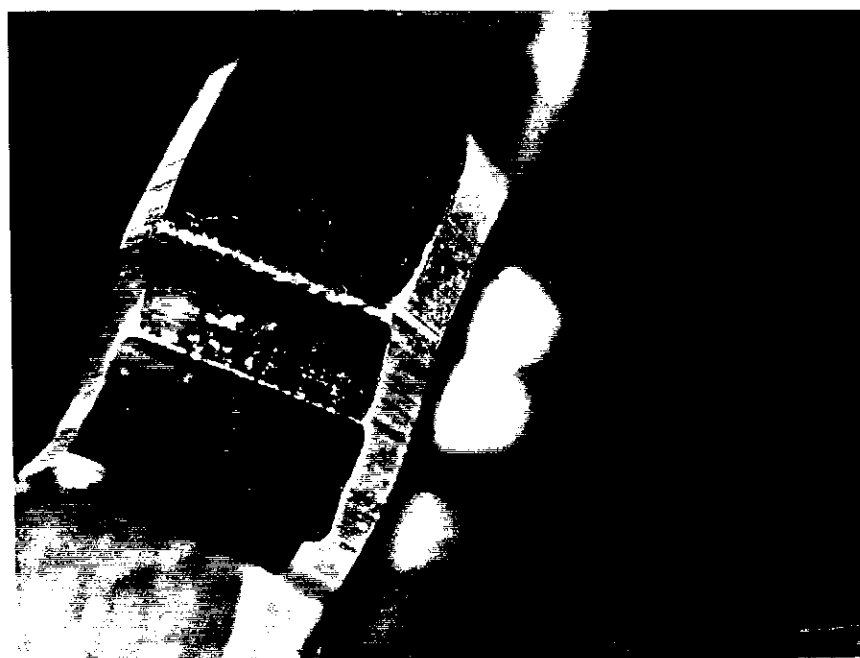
The back edge of a tooth of the circulate wheel after 79h.
